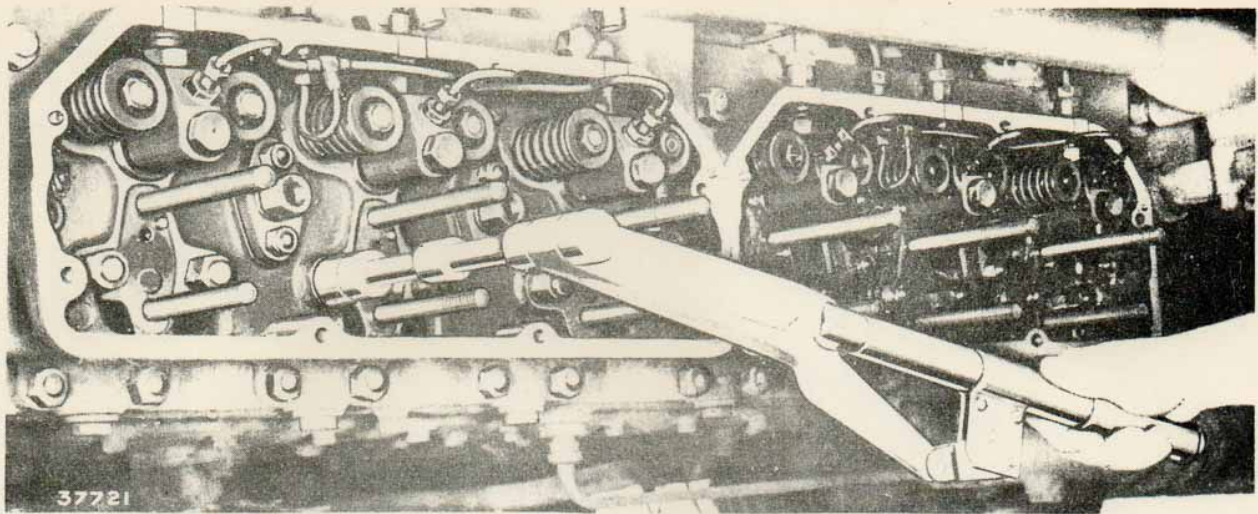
TIGHTENING HEAD NUTS WITH TORSION SPANNER.
